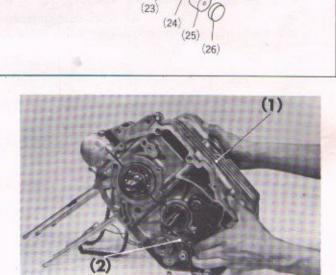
(1) Lower crankcase (2) Gear shift arm
